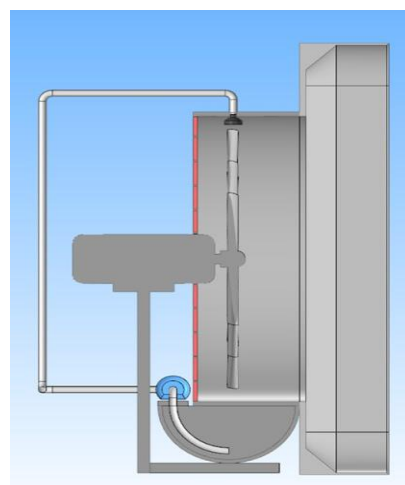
below shows the most commonly used, inexpensive, and efficient cooling system in the cooling systems of compressor units of mining machines, i.e., the cooling system of compressors of mining machines using air fans:
